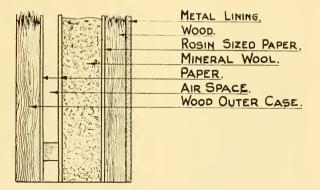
TYPICAL REFRIGERATOR WALL CONSTRUCTION
